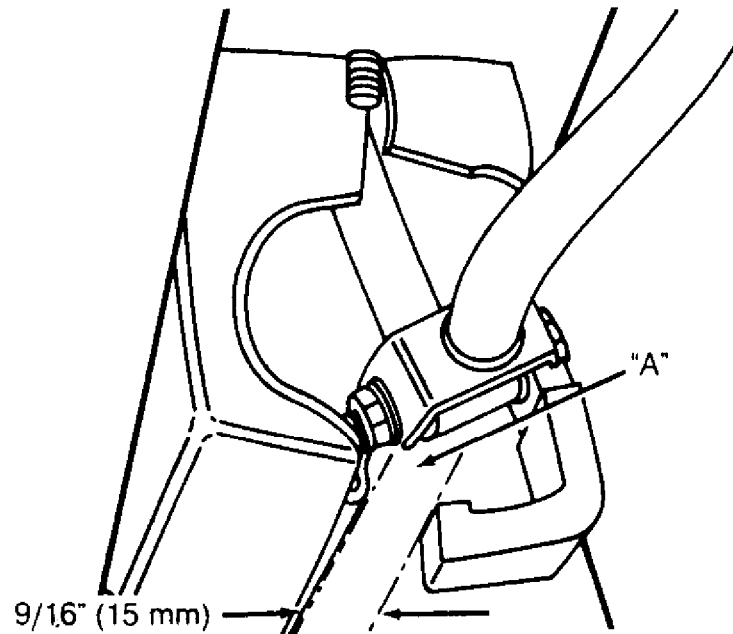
Adjusting Shift Rod End (Cabriolet)
